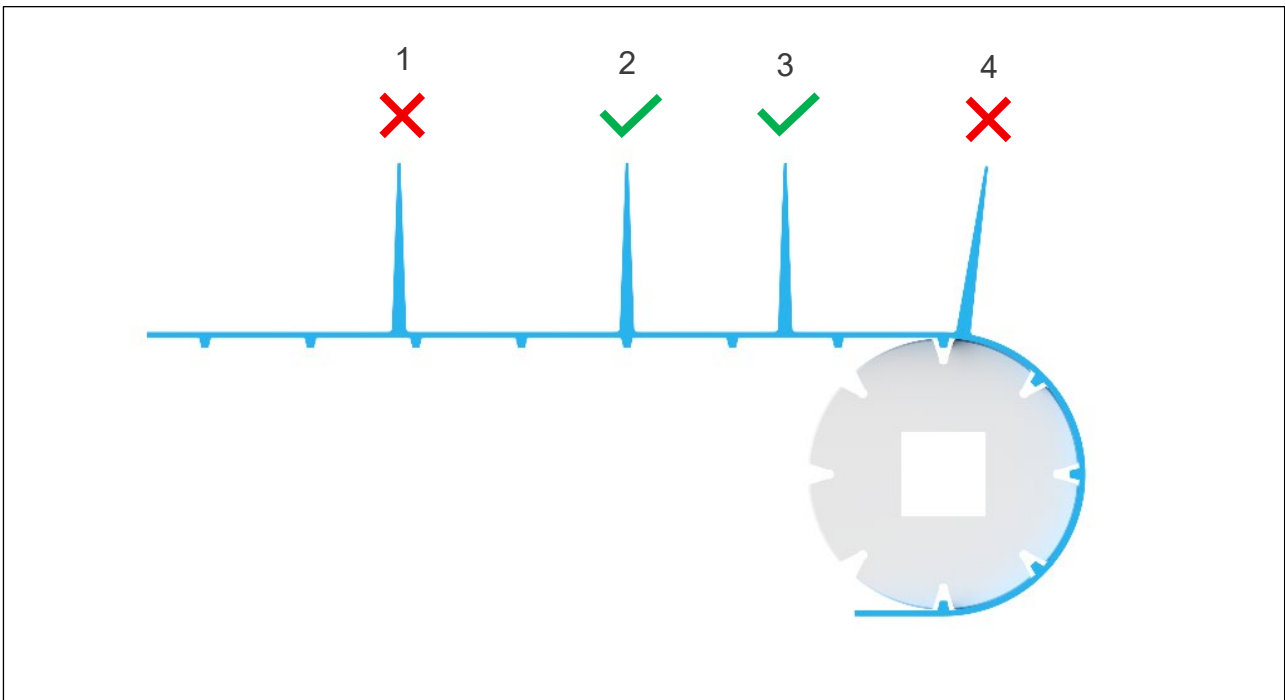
CORRECT PROFILE WELDING
